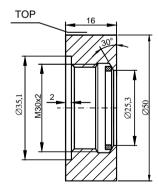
Weldable fitting ring for use with transmitters with CM30x2-type connector Material: 316Lss Sealing: teflon
